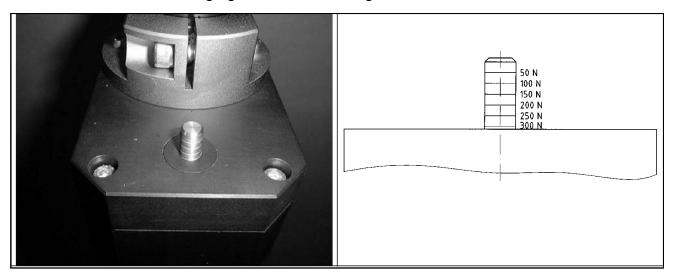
INDICATOR FOR GRINDING PRESSURE
